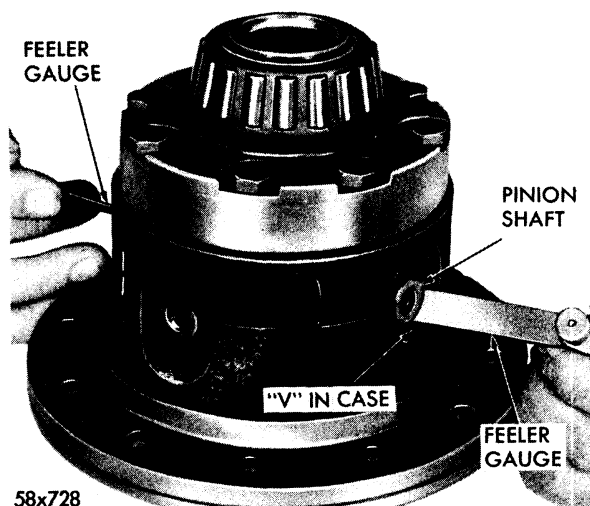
Checking Clearance between Pinion Mate Shafts and "V" in Case
